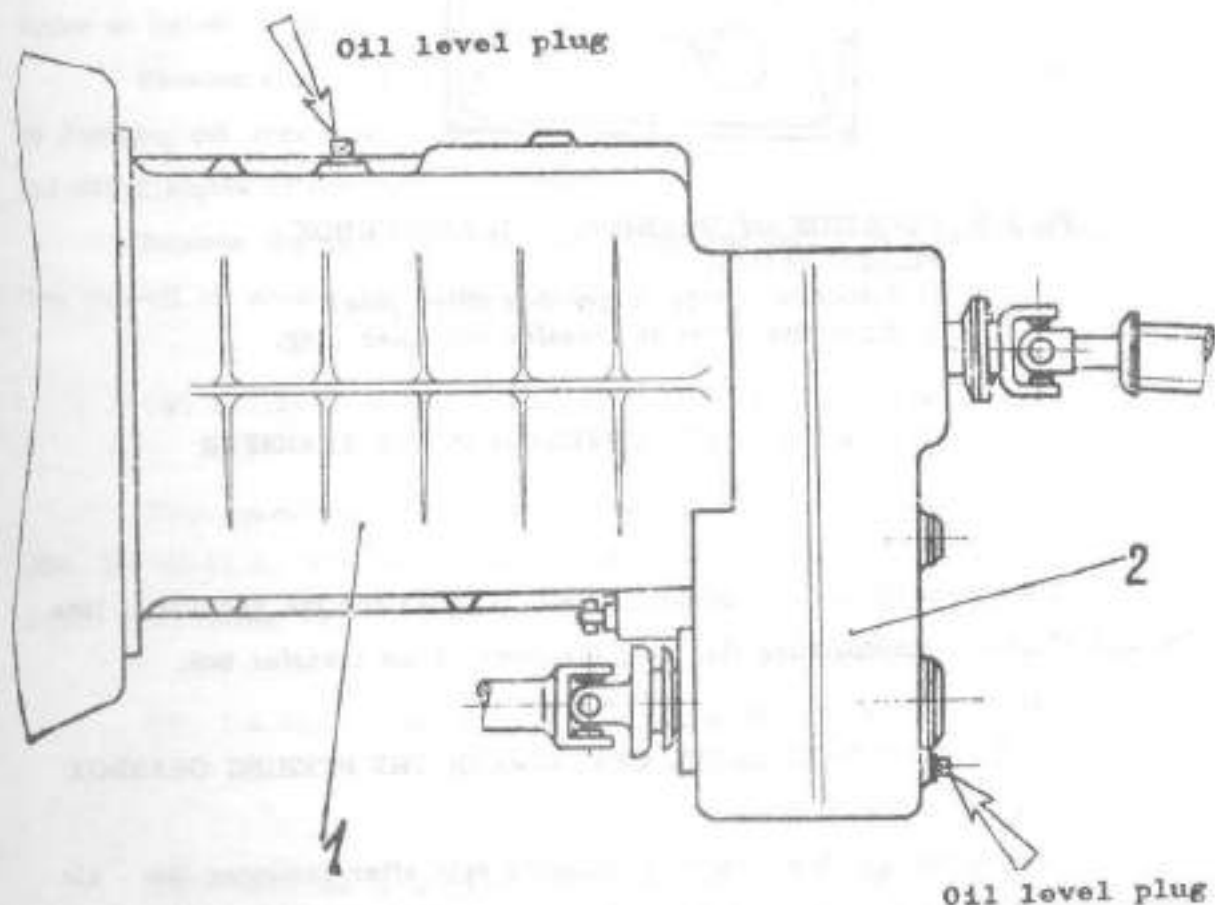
TOP VIEW OF GEAR TRANSFER BOX
